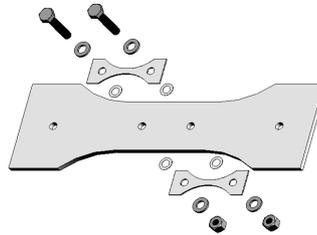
3D image of the sensor attachment to the specimen for fatigue test
